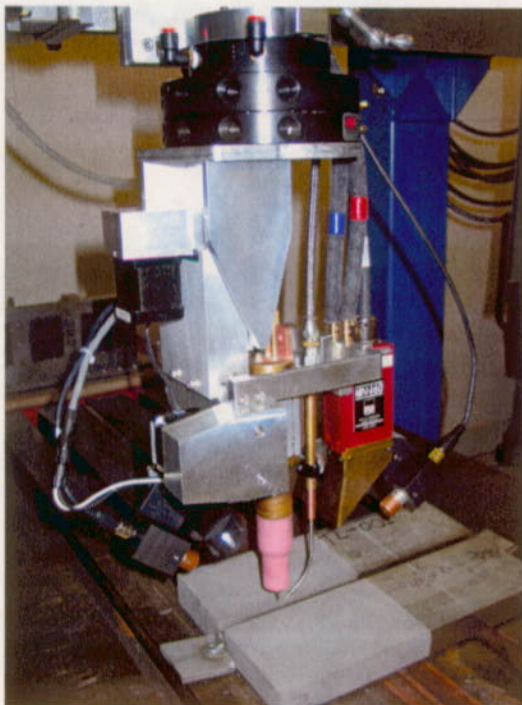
Actual welding end effector mounted on a Cartesian robot for welding trials.
